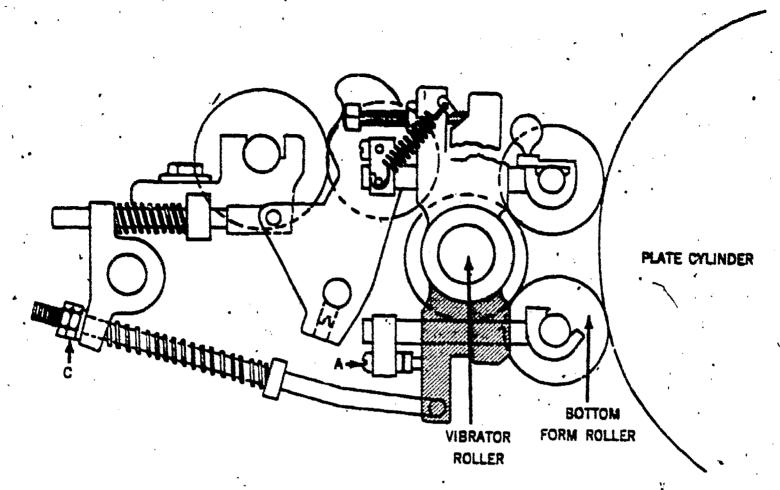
Setting and adjusting bottom form roller (dampening assembly).
